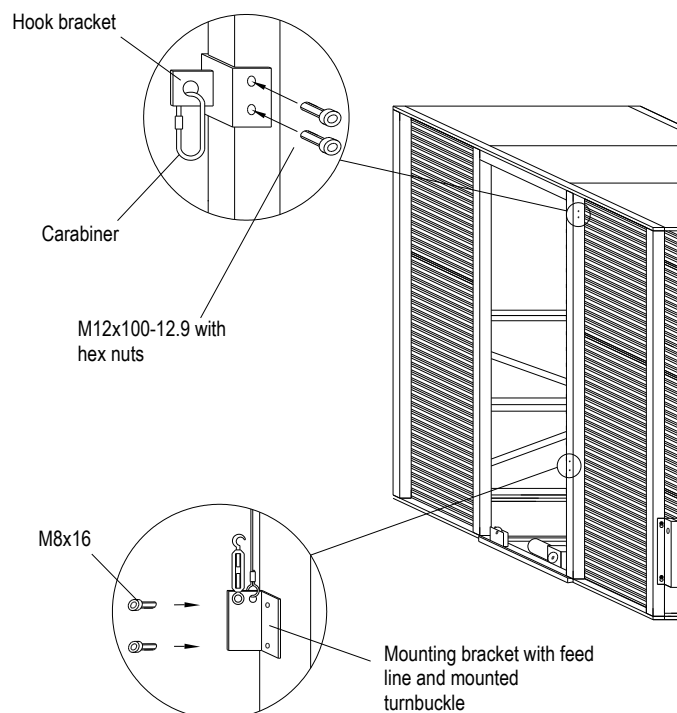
Install hook bracket for the safety rope and mounting bracket with feed line and mounted turnbuckle
